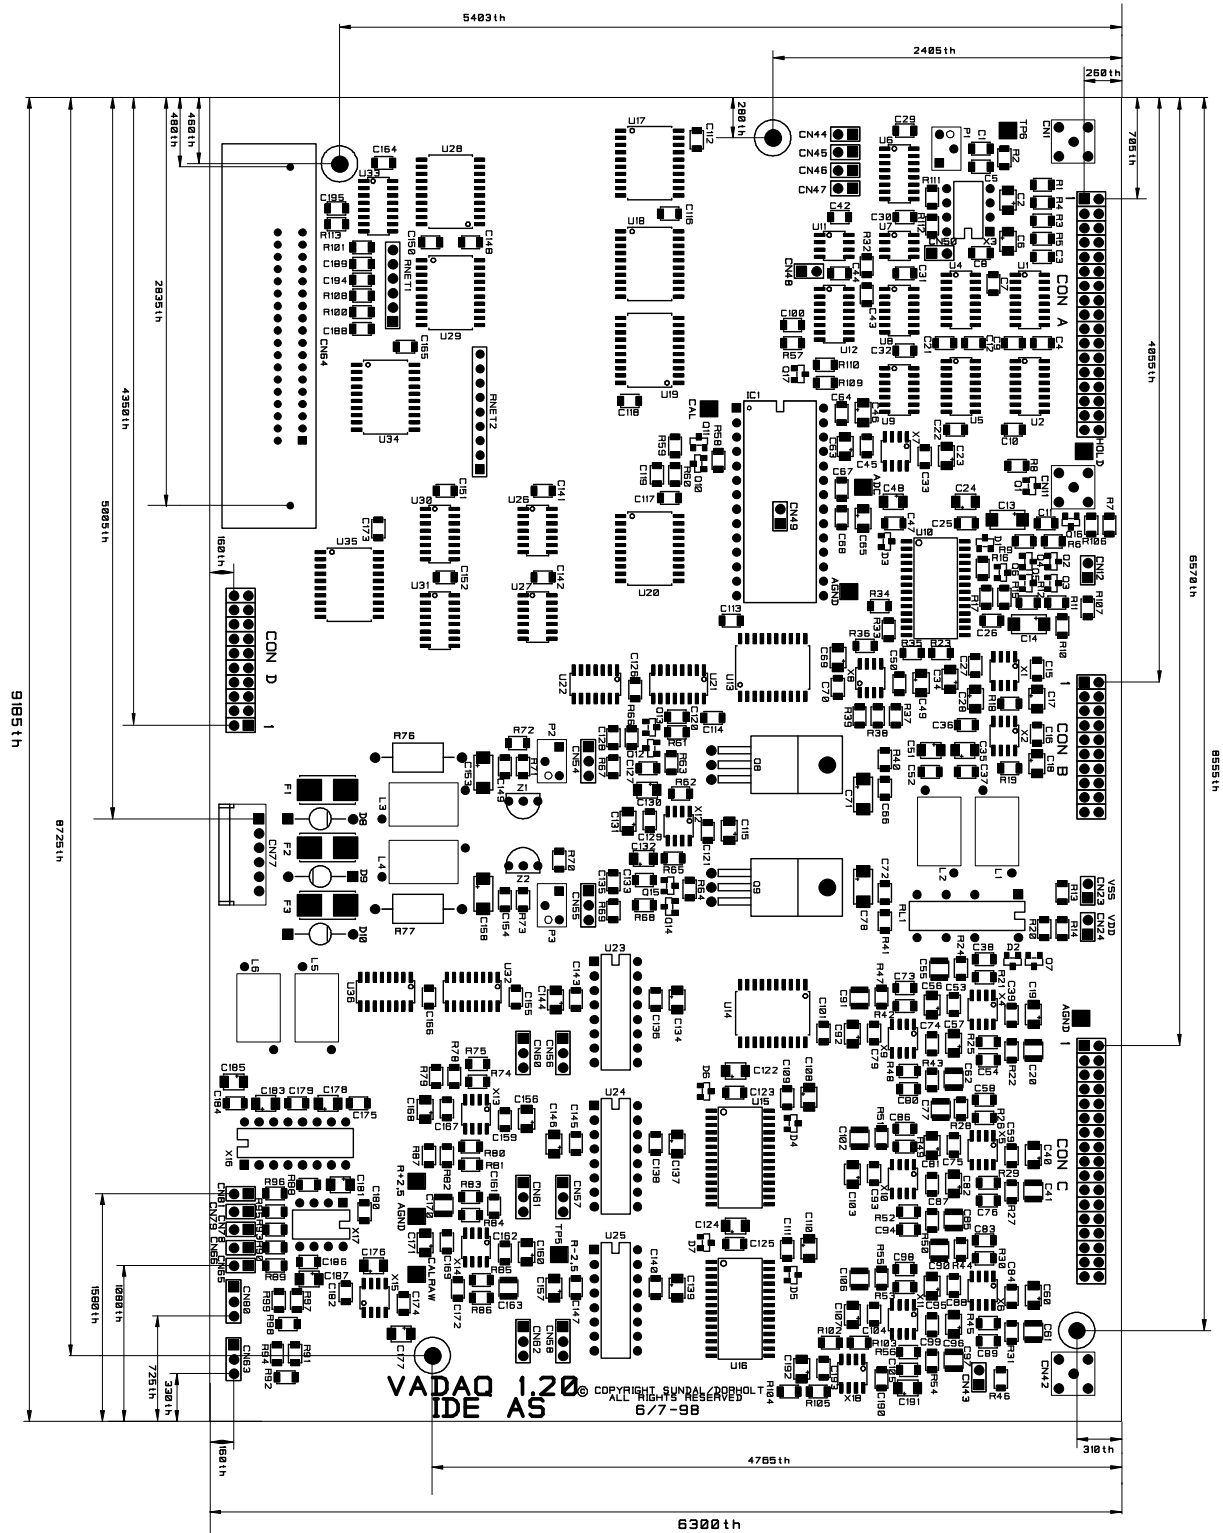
Silk print showing component placement and dimensions of VA-DAQ 1.20.
